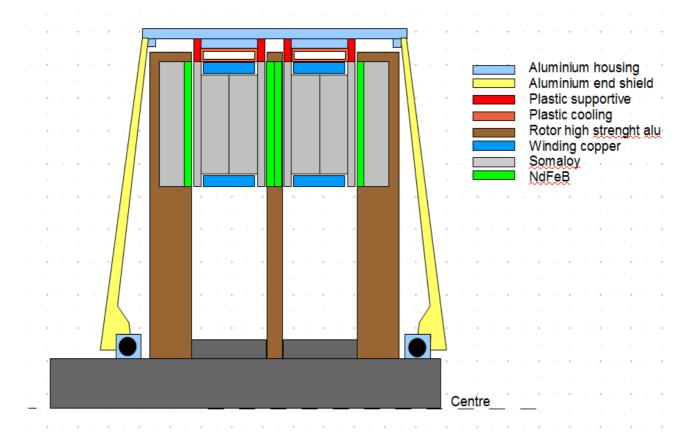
Axial flux machine. Three rotor discs and two yokeless stators
